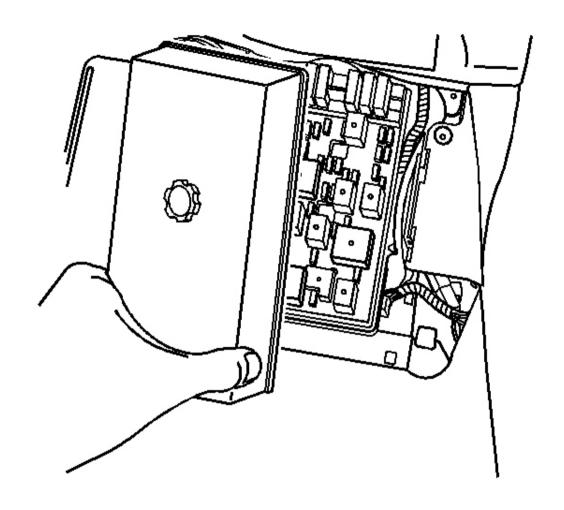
Cover To IP Electrical Center Courtesy of GENERAL MOTORS CORP.
